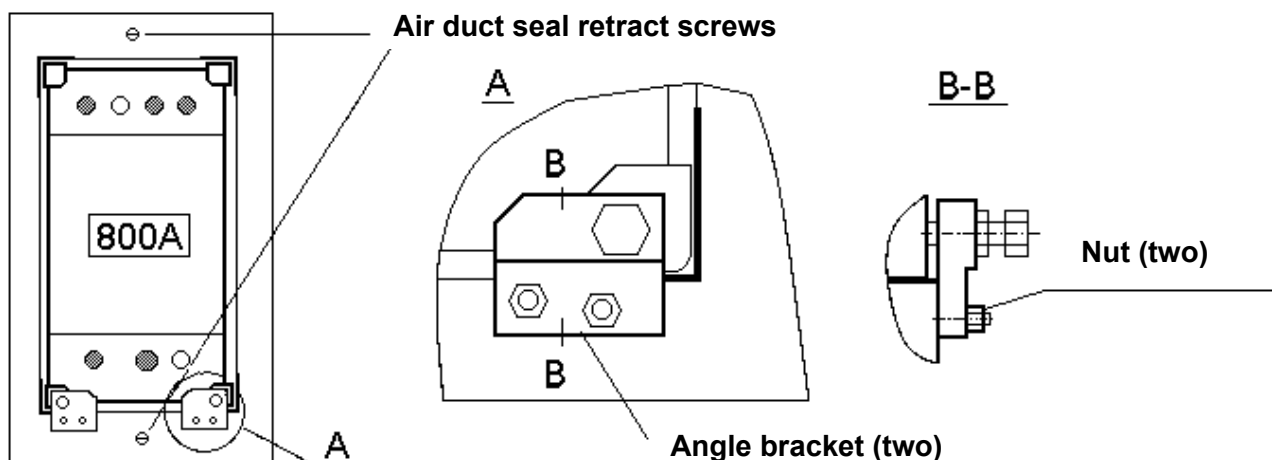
1. Storage Battery 800A Installation and Fastening
